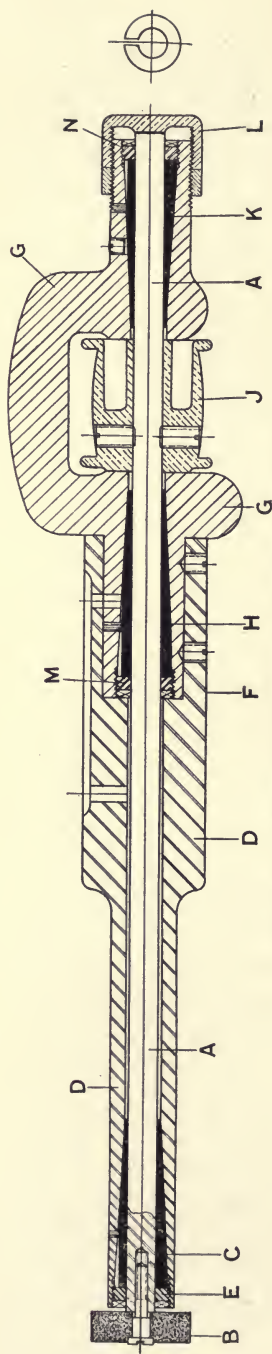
CHURCHILL INTERNAL GRINDING SPINDLE
